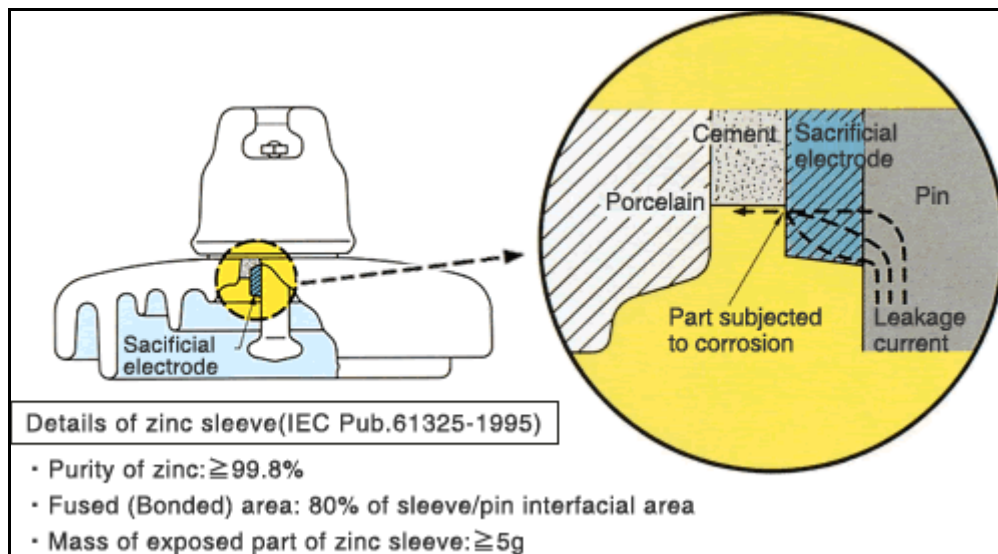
Illustration of a zinc sleeve attached to the pin of a cap-and-pin insulator [57]
